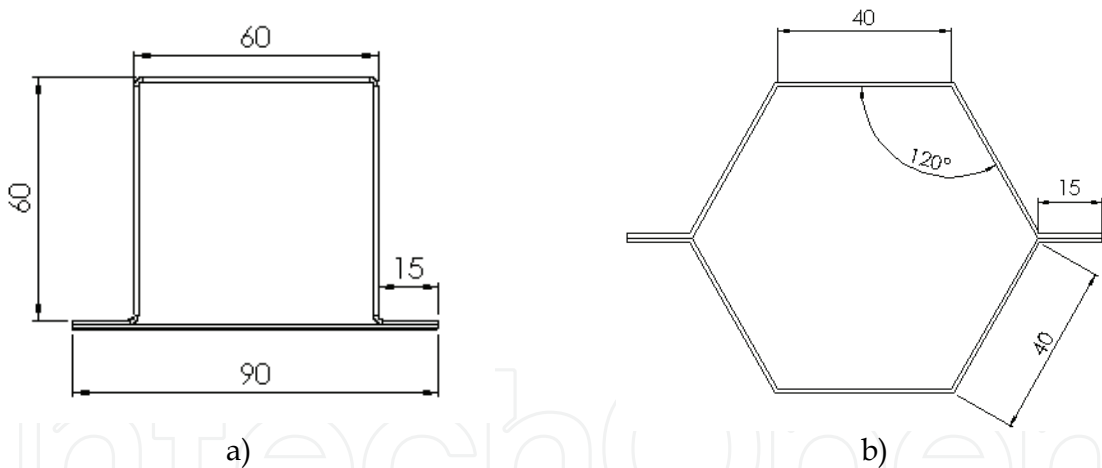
Nominal dimensions of sections: a) Top-hat; b) Hexagonal
